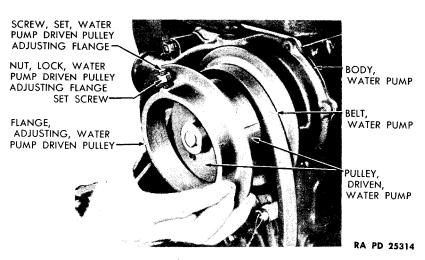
Installing Water Pump Driven Pulley Adjusting Flange
